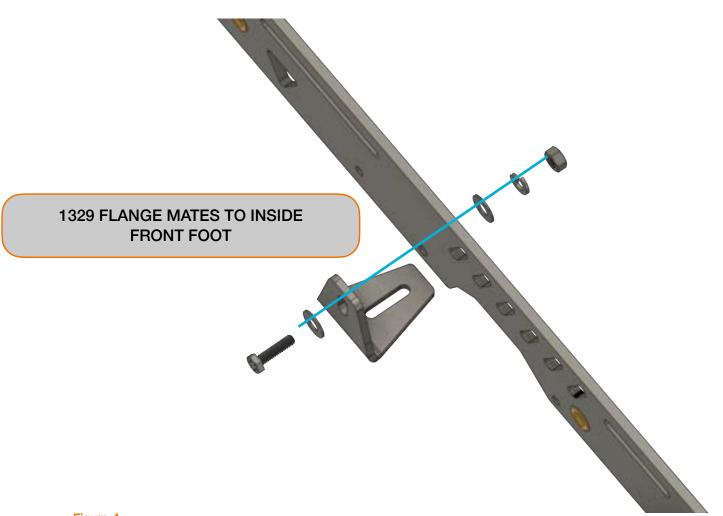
1329 Foot Driver Side (1041) Shown FRONT Location
